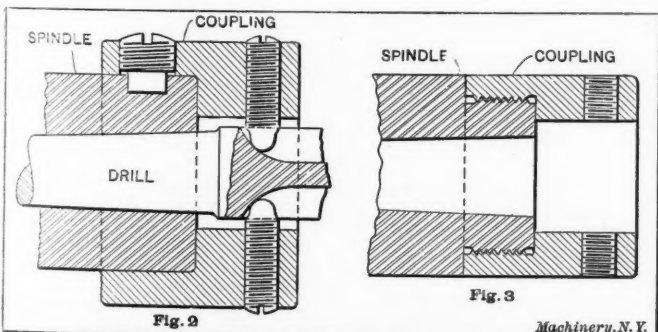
Coupling applied to Drill Spindle with Short Projecting Edge
